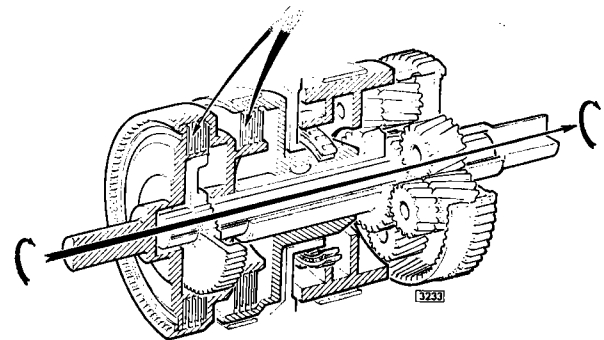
Mechanical power flow — Third gear (D1) selected
